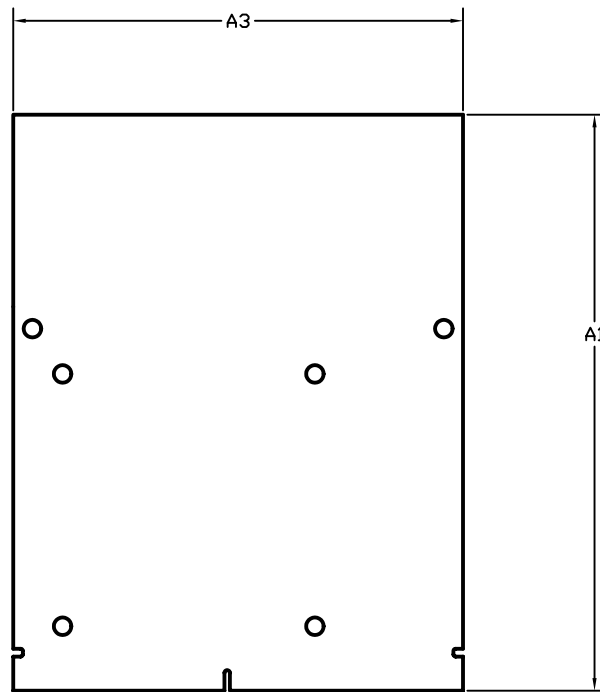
shows the board outlines (top side view) for both Type A and Type B MXM modules.
